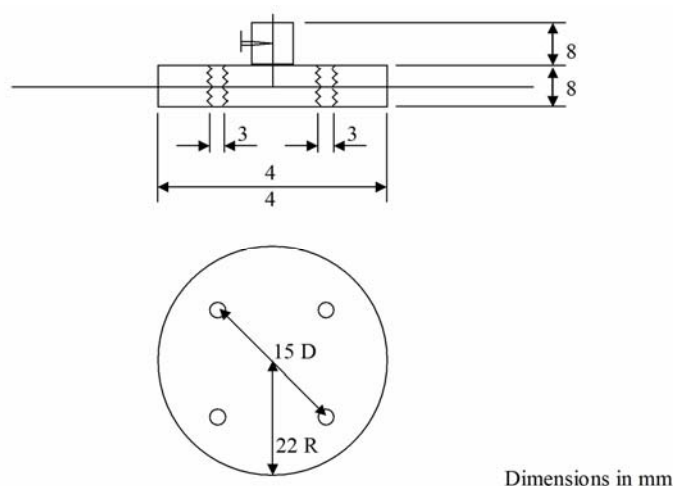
Schematic Drawings of Chopper Blade Mount
